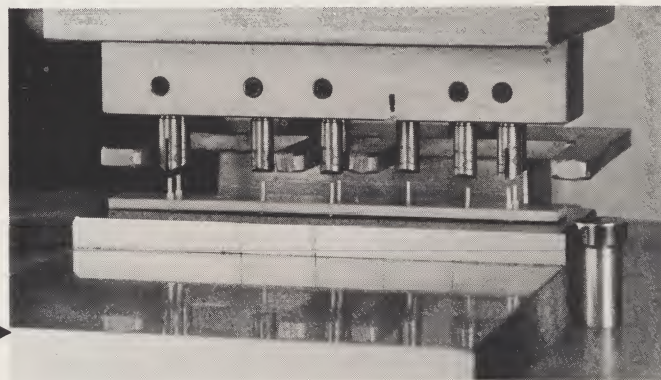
Staking Punch Holder: one of many typical custom-built staking heads used in staking Series 8200 contacts to module cards.
